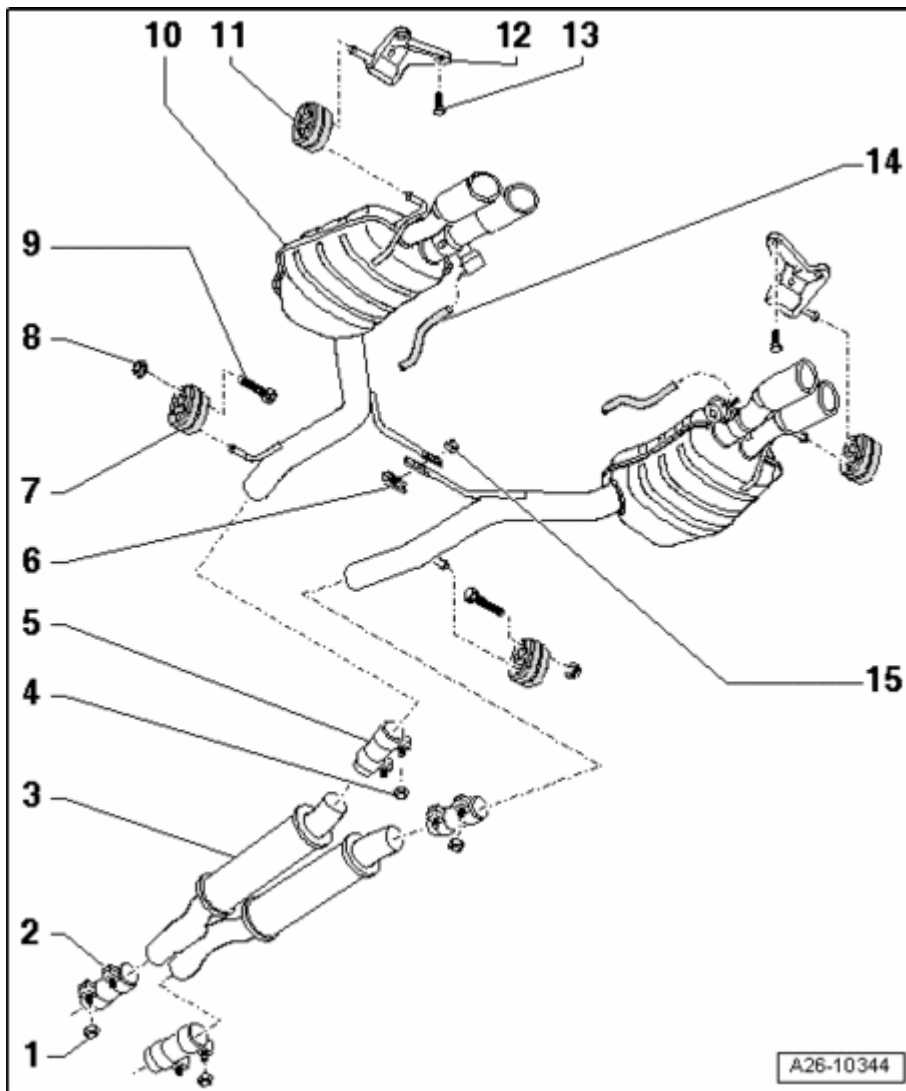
Exhaust System, Component Overview - Exhaust System, Rear
